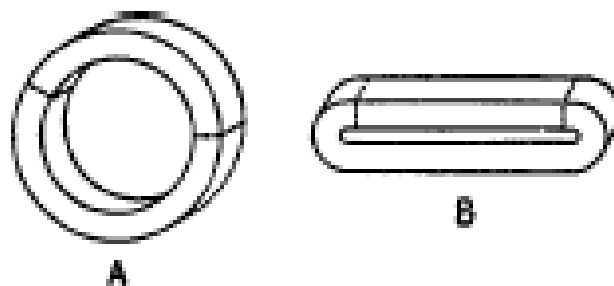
Location of Transverse Tension Test Specimen in Ring Cut from Tubular Steel Products
